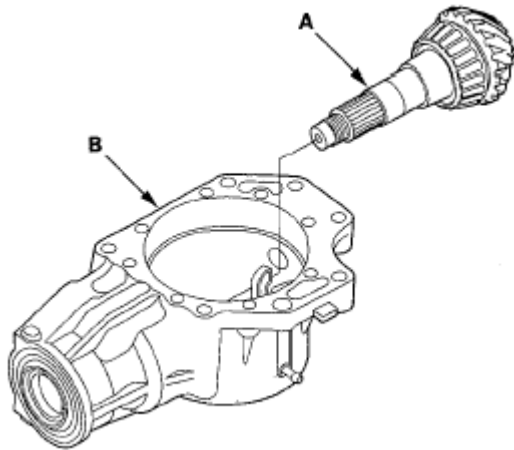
Identifying Transfer Output Shaft (Hypoid Gear) And Transfer Housing
